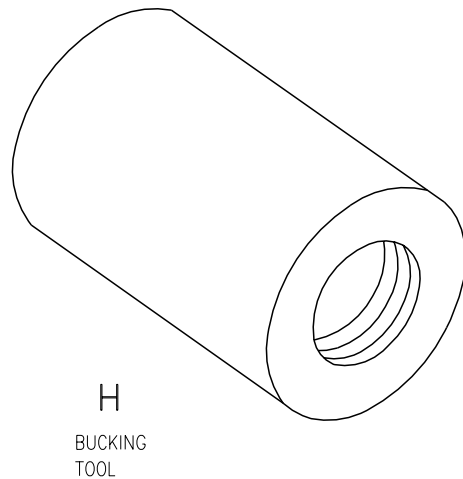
Wing Lug Bushing Installation (Sheet 2)
